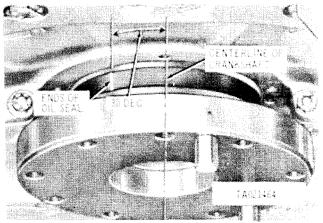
Correct position of crankshaft oil seal split line before installing oil seal retainer.
